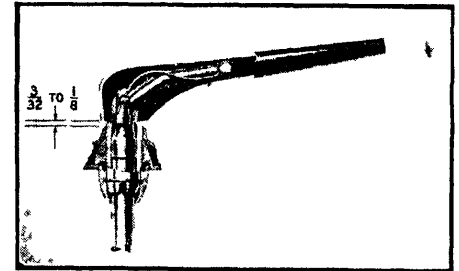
Steering column upper support-to-control lever clearance. Powerglide transmission
